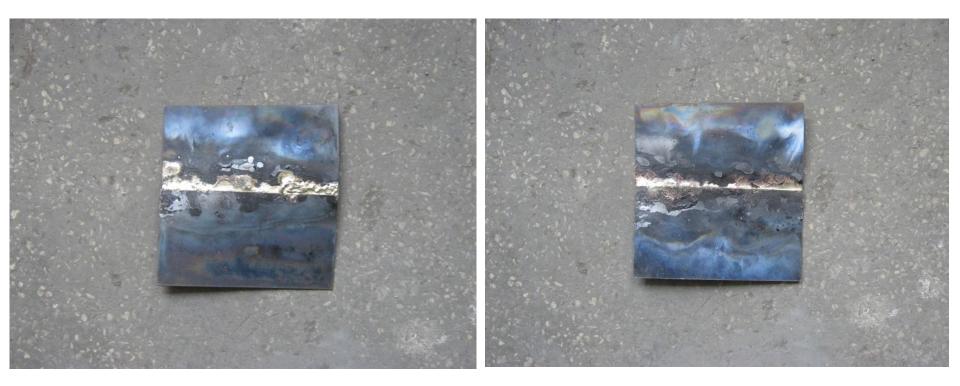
Addition of filler alloy and flux onto the bottom side of the joint
